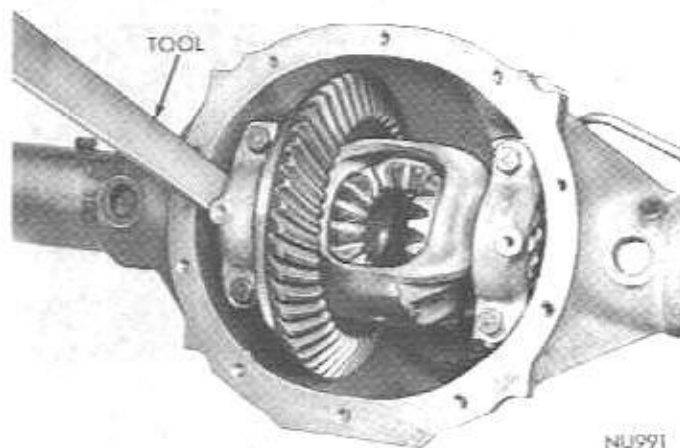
Adjusting Differential Bearings to Eliminate Free Play
